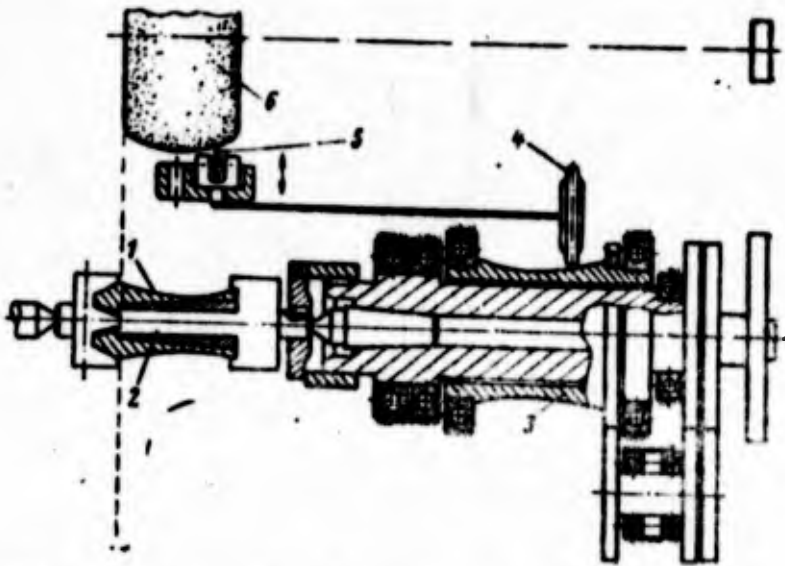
Profiling of abrasive wheel. 1) blade; 2) mounting; 3) master form; 4) roller; 5) hard-alloy roller or diamond; 6) abrasive wheel.
